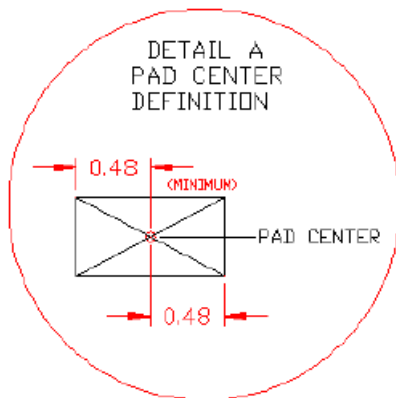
Host Board Required PCB Layout Pattern: To Pad Center Edge Relative to Origin
